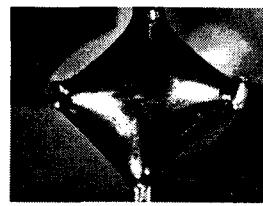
Weld bead shapes of LB(spot) welding for lower side
